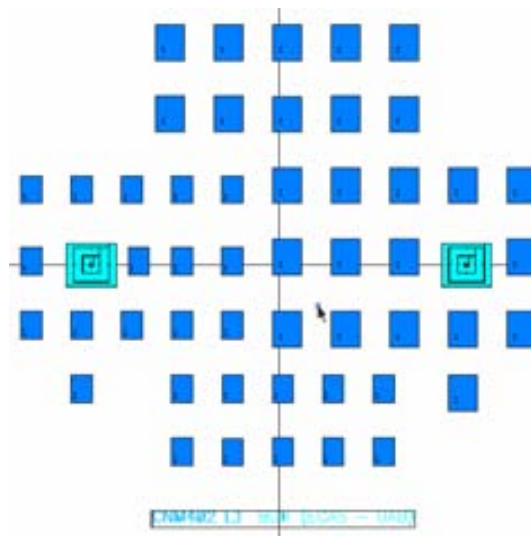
Chip mask and opening window mask to fabricate the stencil.
